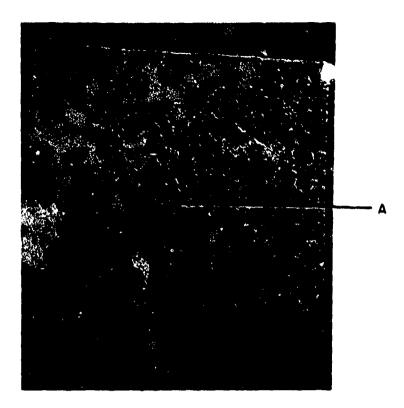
Fracture surface of an A-36 Charpy specimen tested at  $-83^{\circ}$ C, 7x.
